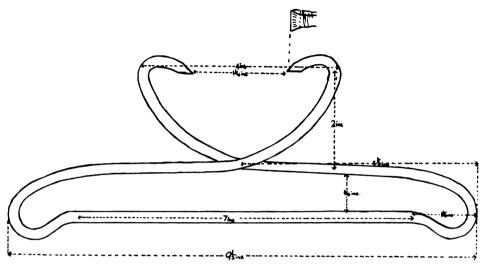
The Millbank Clip. Spring steel, 1 in. diameter, or mild steel.
